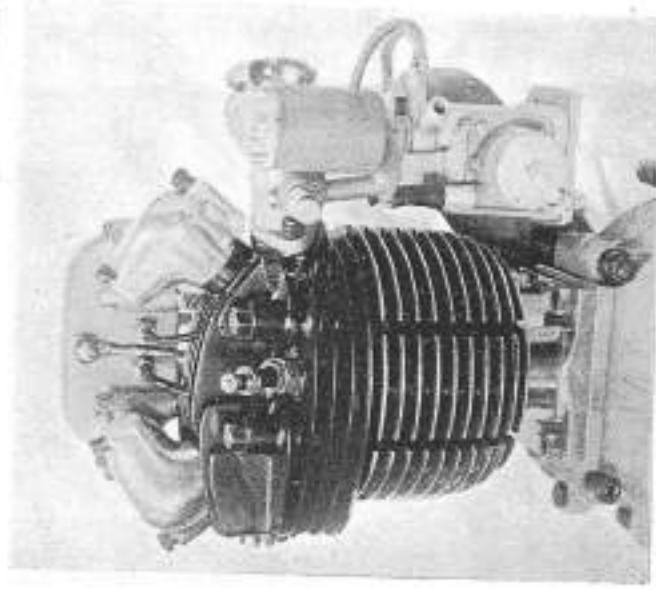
SHOWING CYLINDER, CRAXDEN HEAD AND ROCKER-BOX ASSEMBLY ON 1938 J.A.P. 509 C.C. 8-VALVE ENGINES
